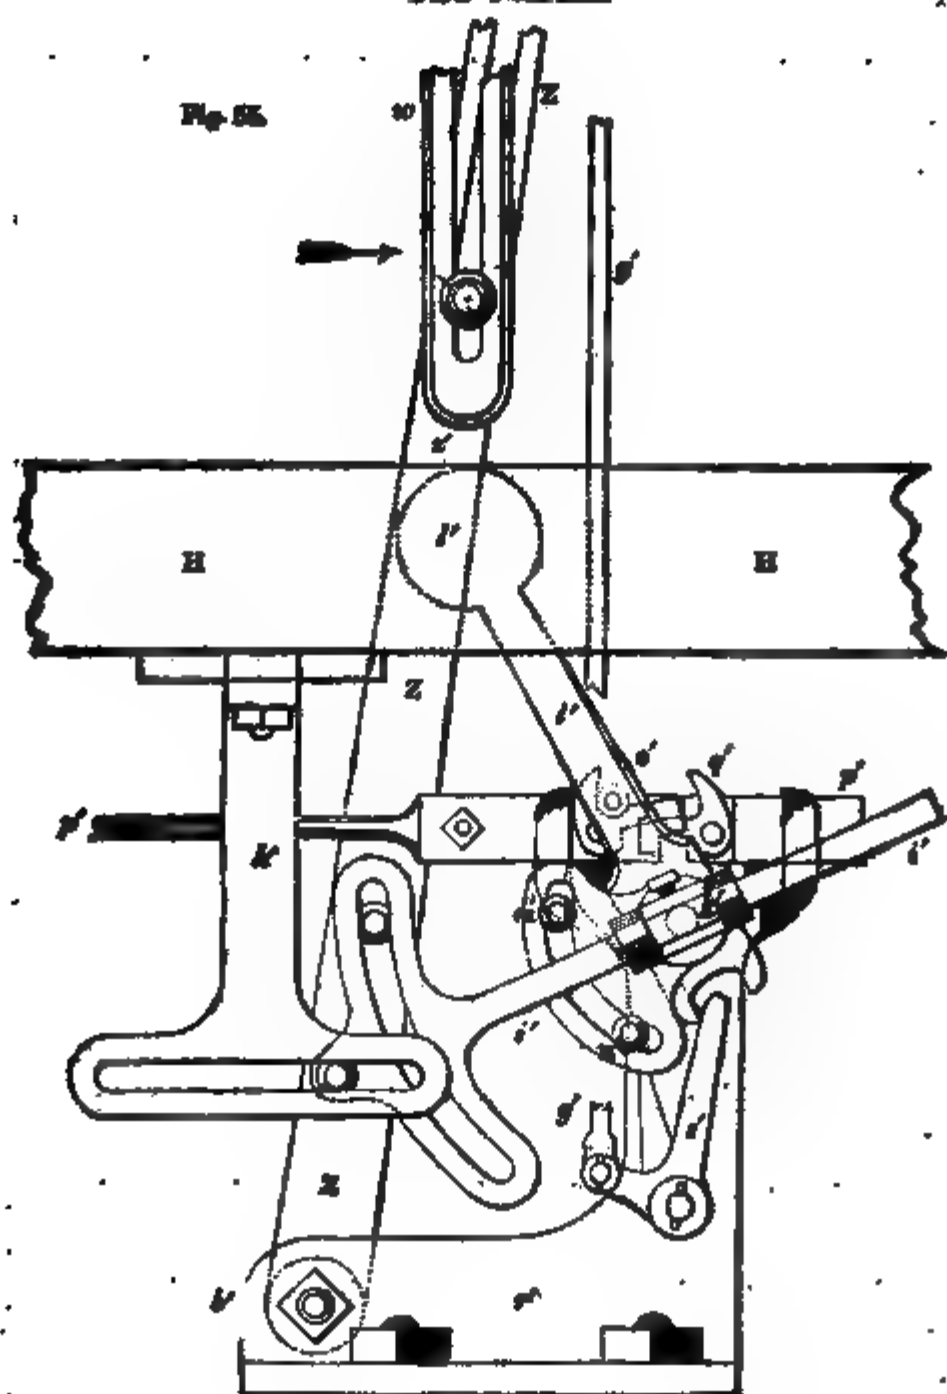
Rack-shifting Mechanism of Bobbin and Fly Frame.
